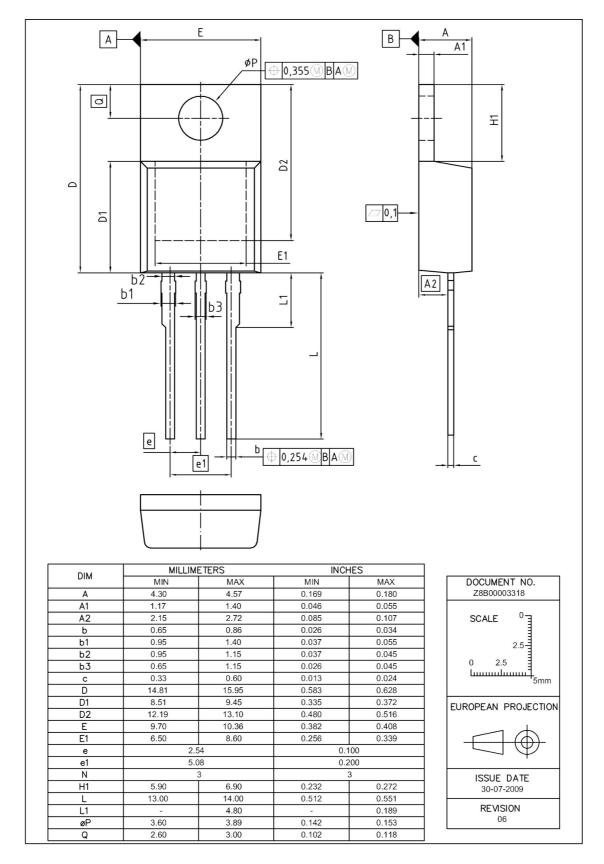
Outline PG-TO 220, dimensions in mm/inches
